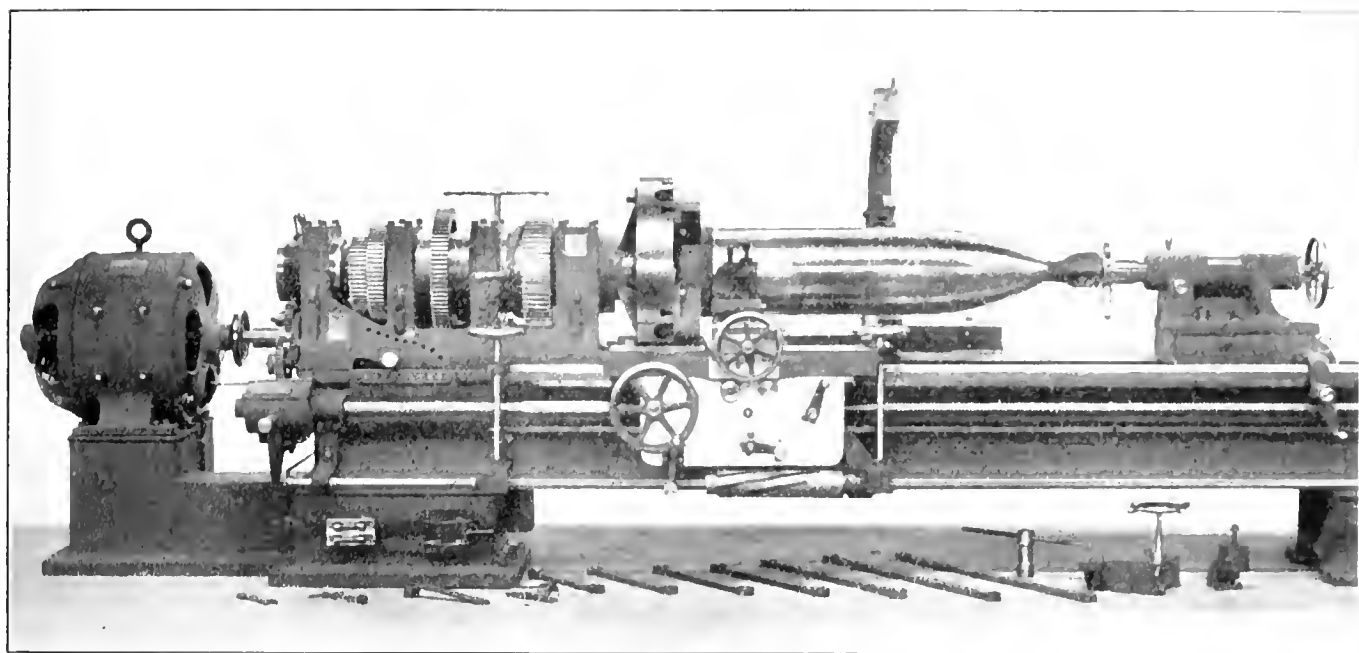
Front View of Lathe showing Device beneath Carriage for Automatically Regulating Speed to Diameter
